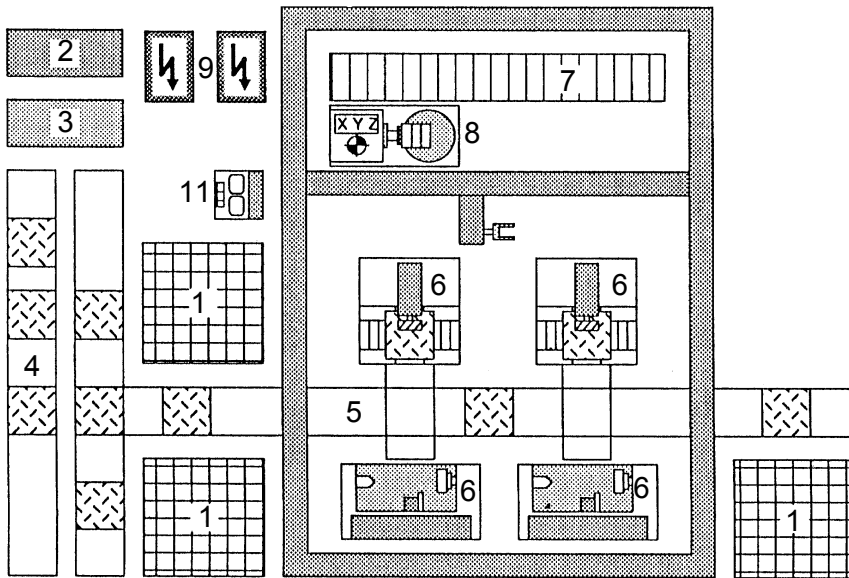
The main units of a flexible manufacturing system: 1 – part store, 2 – fixture store, 3 – fixture/pallet assembly building station, 4 – queue area, 5 – pallet moving system, 6 – machine tool, 7 – cutting tool store, 8 – tool preset gauge, 9 – control system, 10 – cutting tool moving system, 11 – supervising station
